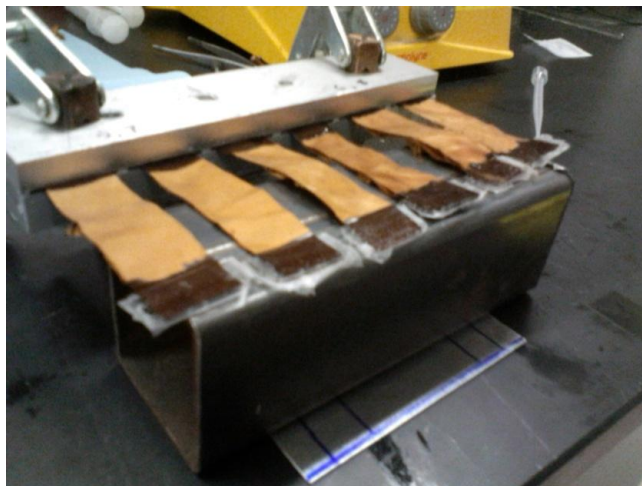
PDMS Grip Section Casting of Pre-oxidized PAN Samples in Custom Mold
